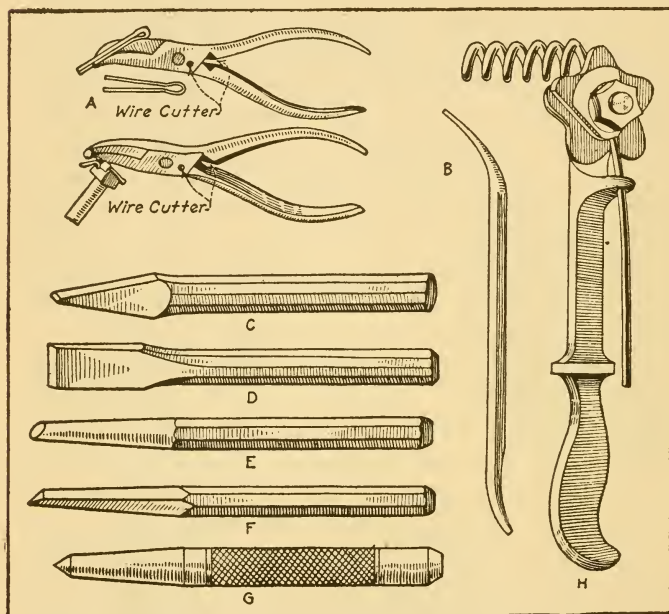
Cotter Pin Pliers Shown at A—Cotter Pin Extractor Shown at B—Chisel and Punch Set, C to G Inclusive—Spring Winder at H.
